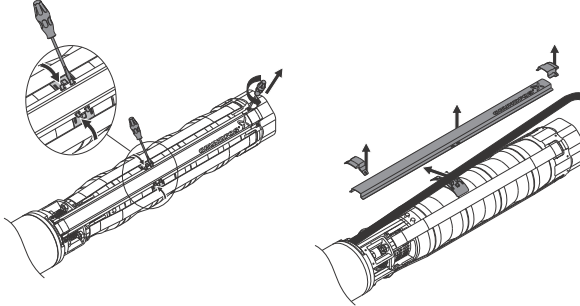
Removal and fitting of cable guard for SP 5S, 7S, 10S, 16S, and 25S (smooth shaft)
